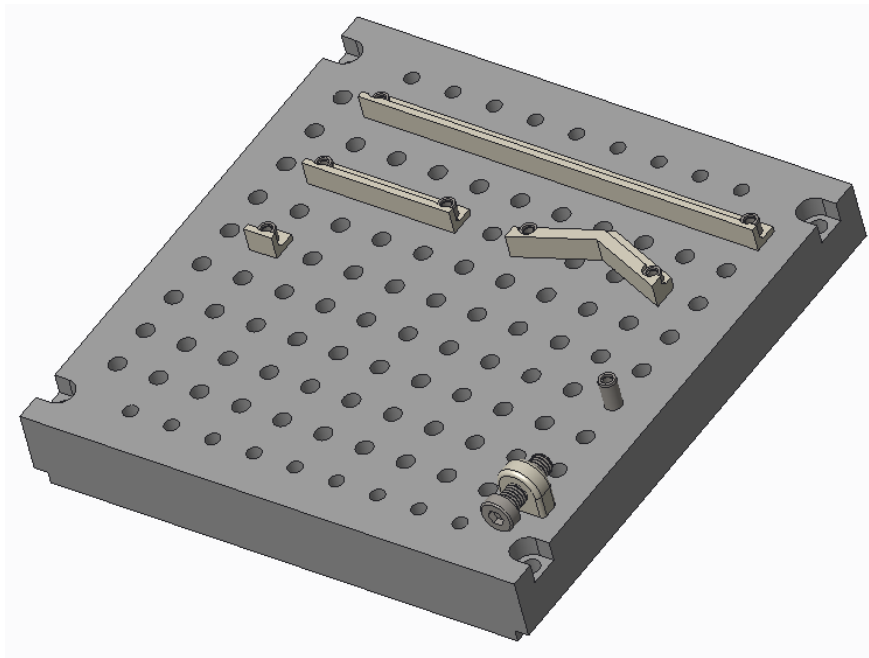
Hole pattern, taken from drawing. See Appendix F for full drawing.
